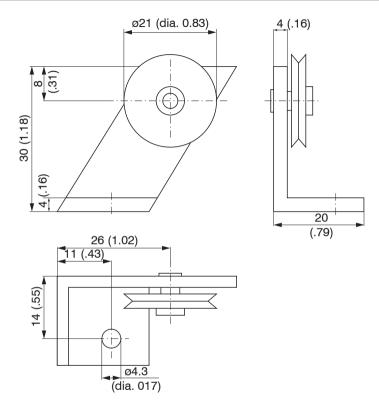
Deflection pulley TR3-WDS with mounting foot, dimensions in mm (inches, rounded off)
